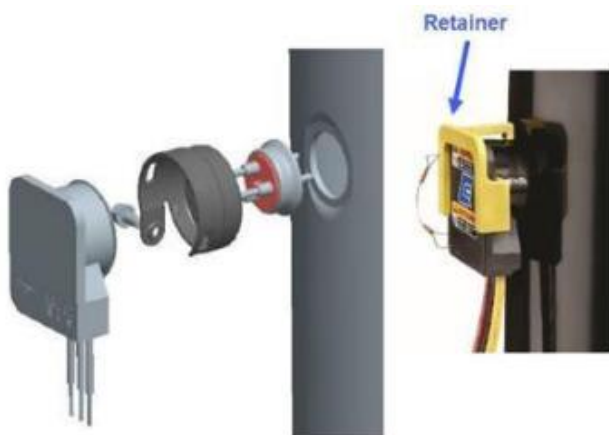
Principle of Connecting the Molded Plug Power Cable to the Connection Pins
